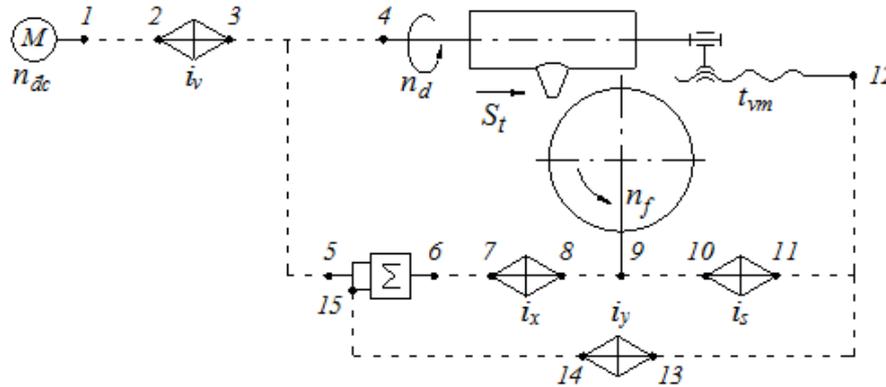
Kinematic Structure Diagram of a Gear Hobbing Machine for Worm Wheel Machining
